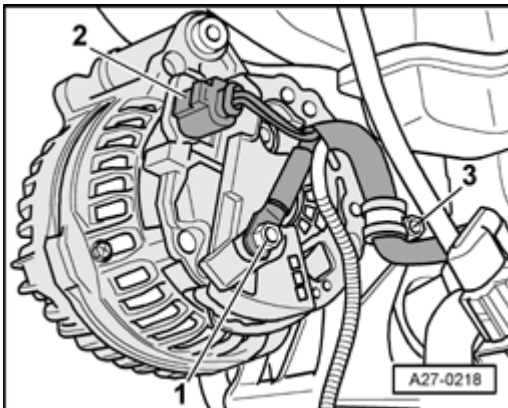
Identifying Connector, Electrical Wire And Wiring Clamp On Generator
